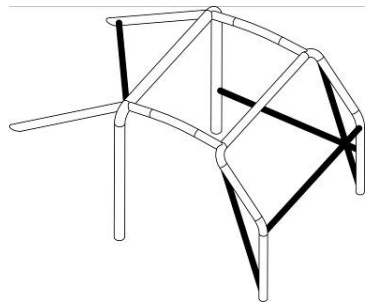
One diagonal strut compulsory (according to Drawing 253-4 or 253-5).
